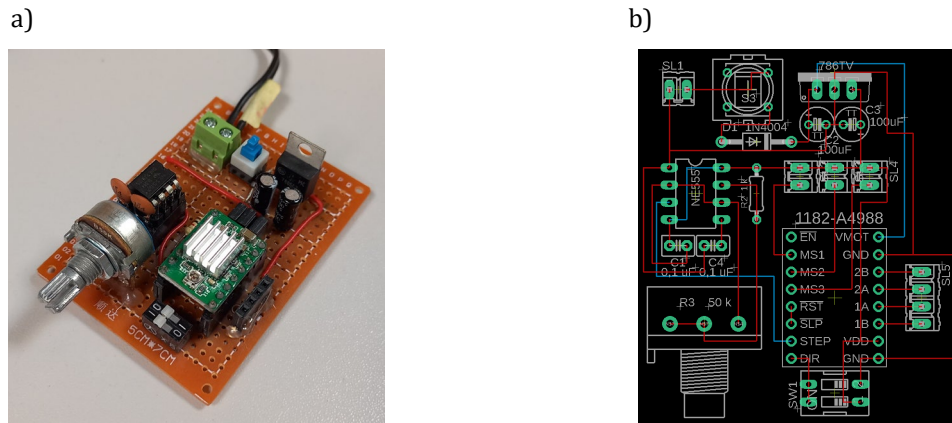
Stepper motor control system: a) assembled device, b) arrangement of components on the PCB.
